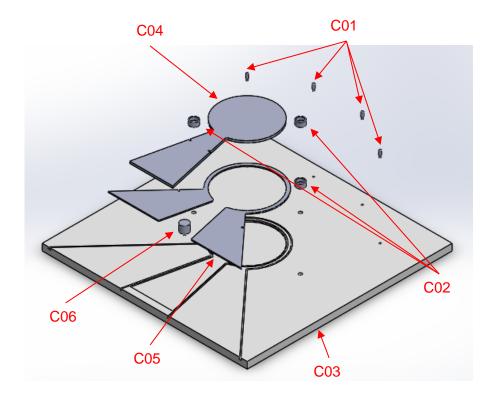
Exploded View of Wire Bending/Burst Disk Machine
